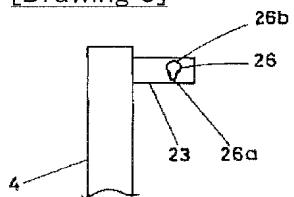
[Drawing 2][Drawing 3]
